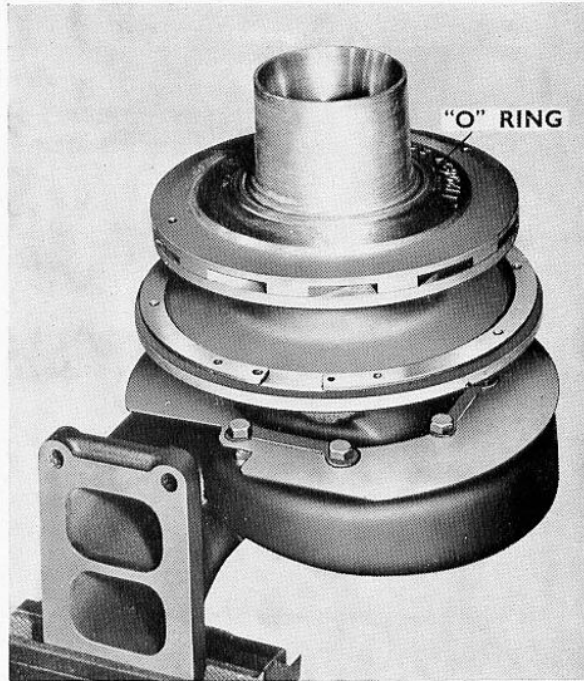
COMPRESSOR EXTENSION AND 'O' RING IN POSITION
